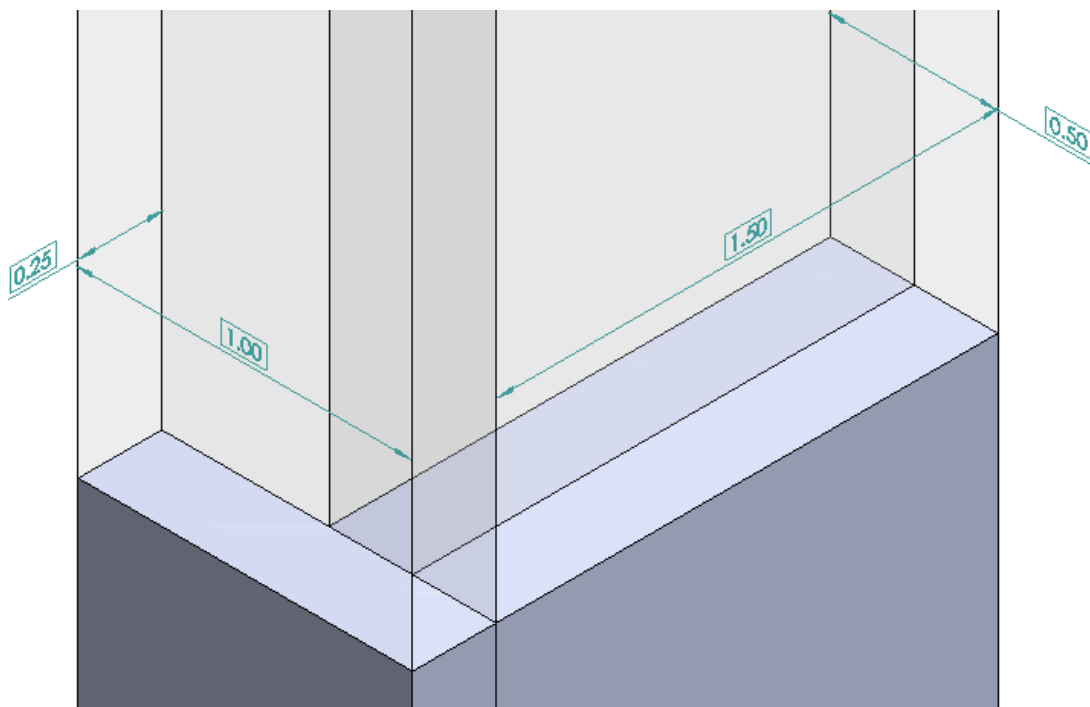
A CROSS-SECTIONAL VIEW OF THE DIMENSIONS OF THE PIECES OF THE TRACK.
